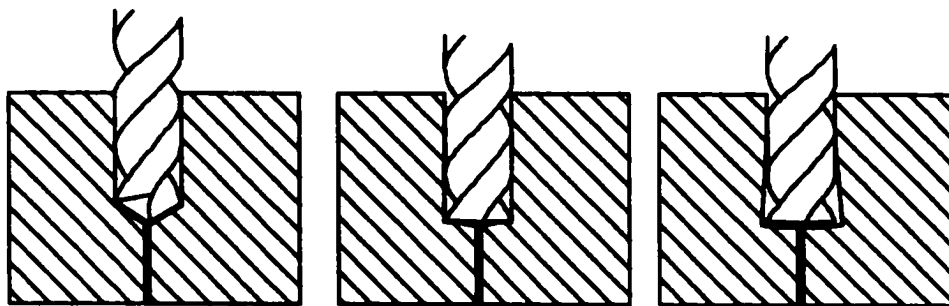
Schematic diagram of drilling a flat bottomed hole into glass. The bottom of the hole widens out into a "fishtail" if the flat tipped drill is forced to deepen the hole beyond the depth left by the pointed drill.
